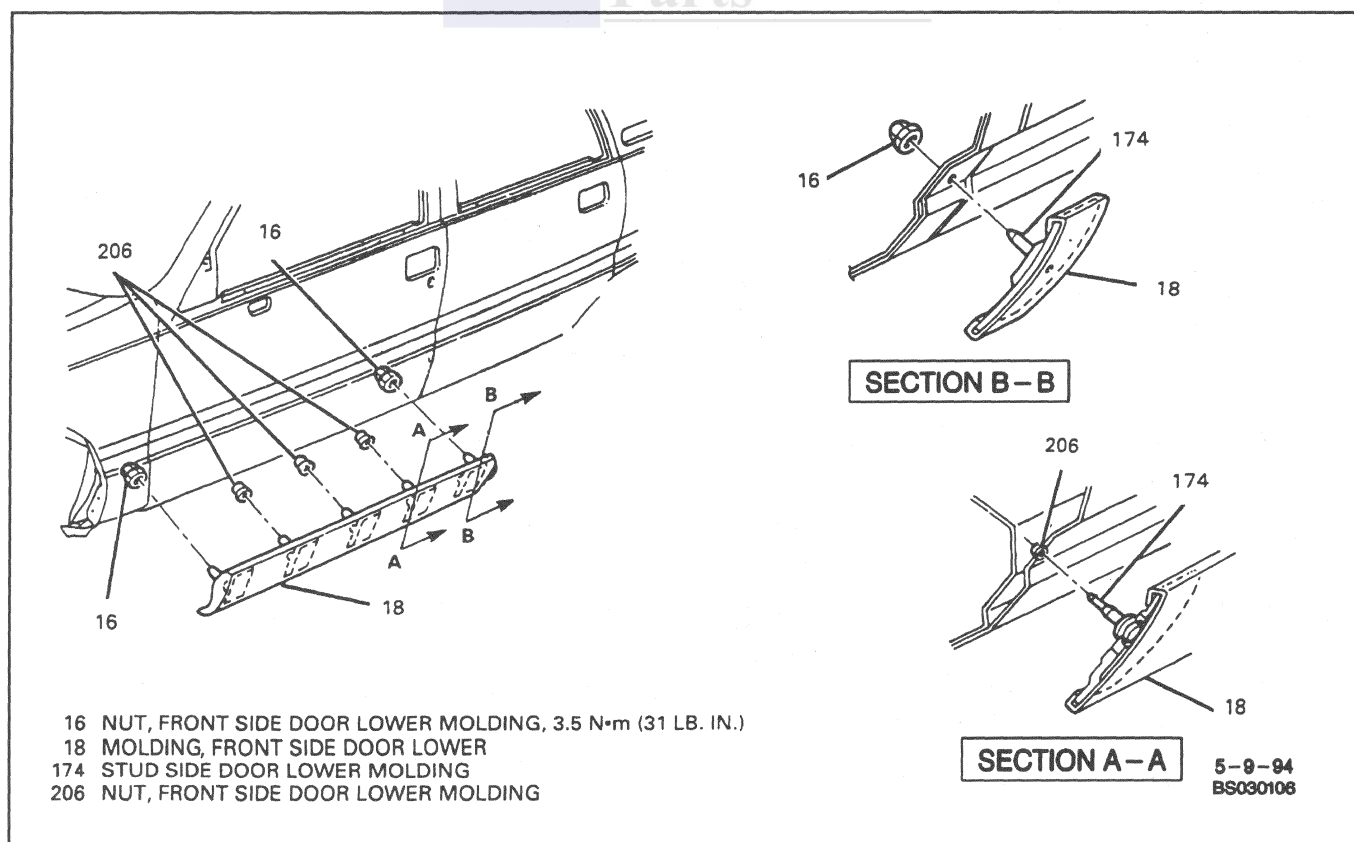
Removing Front Side Door Lower Molding-(Typical)
